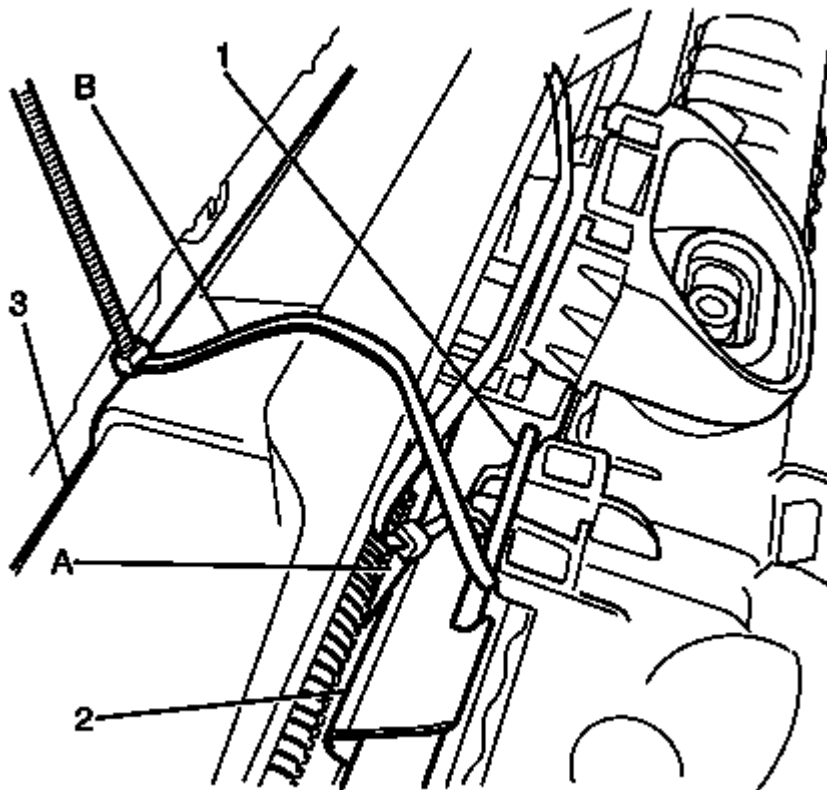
Identifying Front End, Radiator & Condenser Assembly
